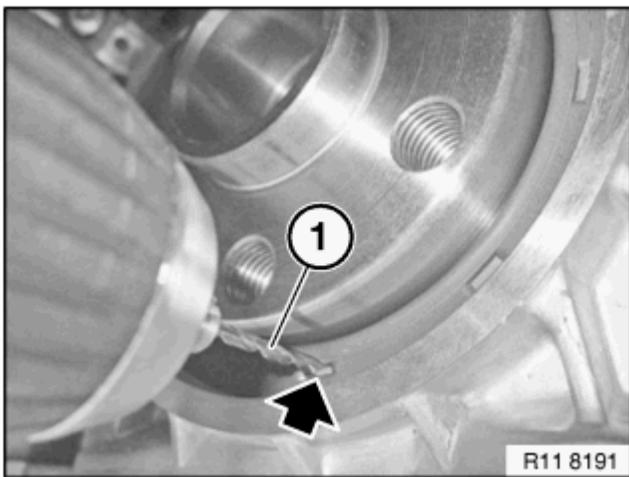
Drilling Hole In Radial Shaft Seal Using Drill
